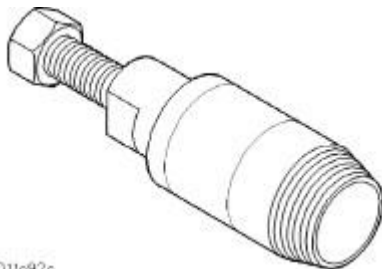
INSTALLER, CRANK SPROCKET - 6792-1
